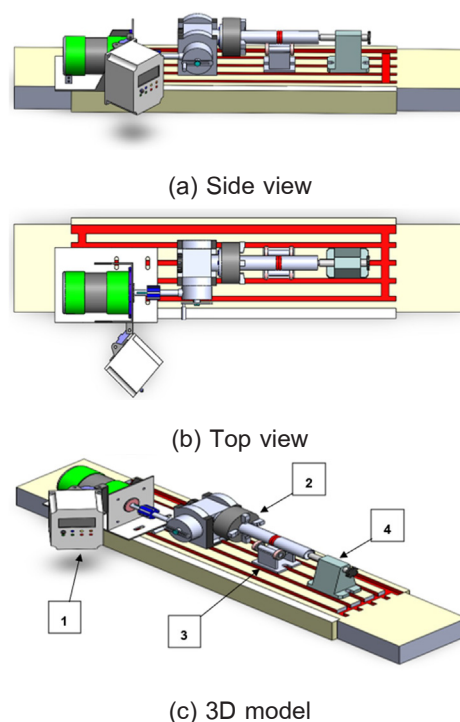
Schematic of friction stir welding machine for aluminum pipe work
